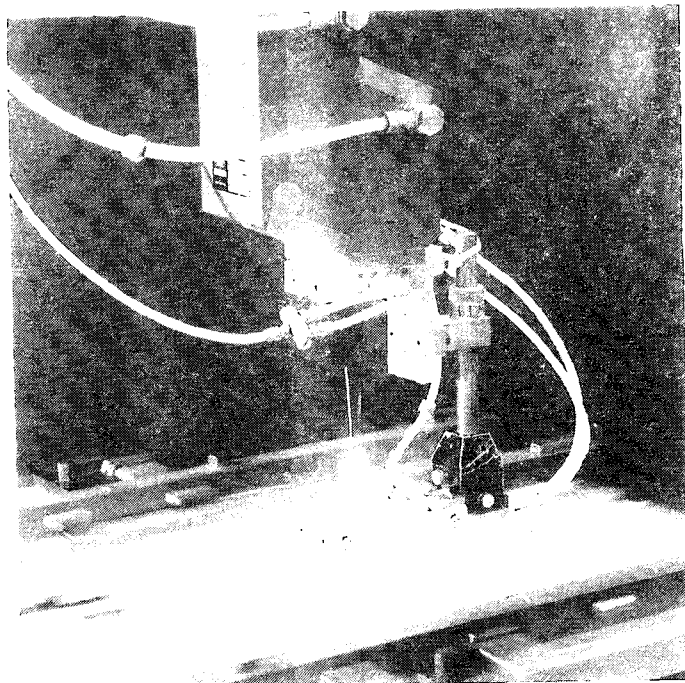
CO₂ laser welding of aluminium sheet
